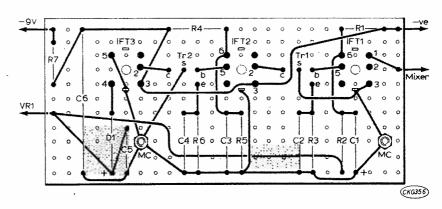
Wiring details under the i.f. amplifier board. Points marked MC are the bolts fixing the board to the chassis.
